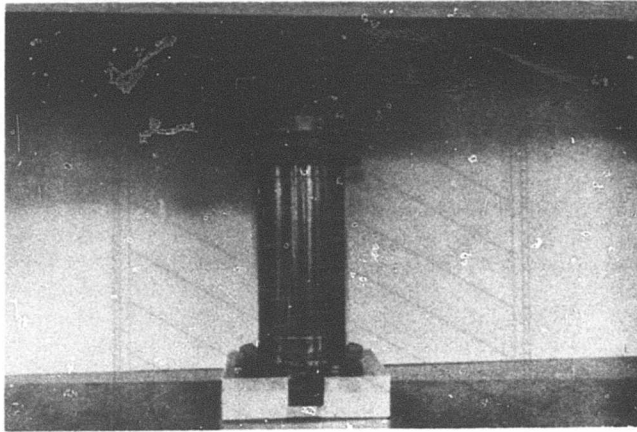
Series 2 Test Vehicle and Loading Jig in Testing Machine.
